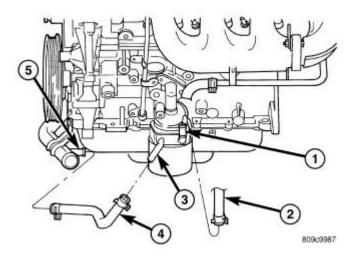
Engine Oil Cooler Hoses Courtesy of CHRYSLER LLC
